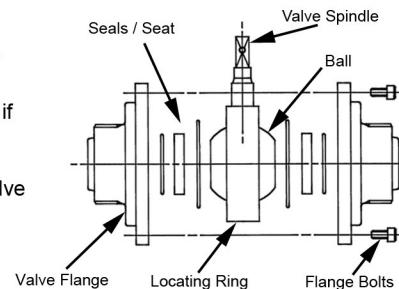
Remove flange bolts and separate the valve halves to reveal valve internals
